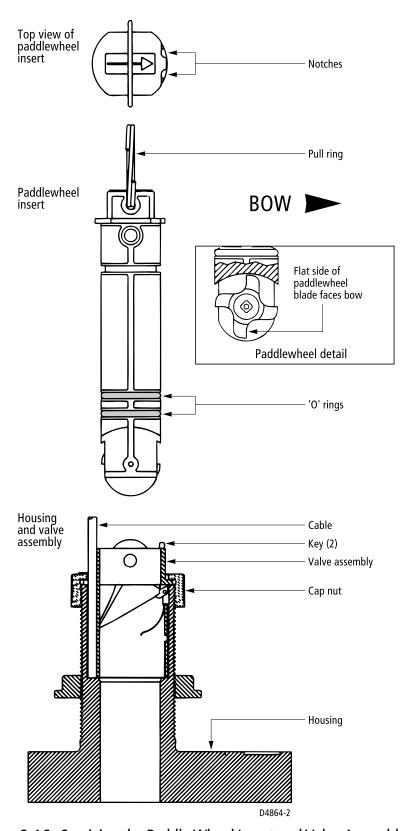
Servicing the Paddle Wheel Insert and Valve Assembly
